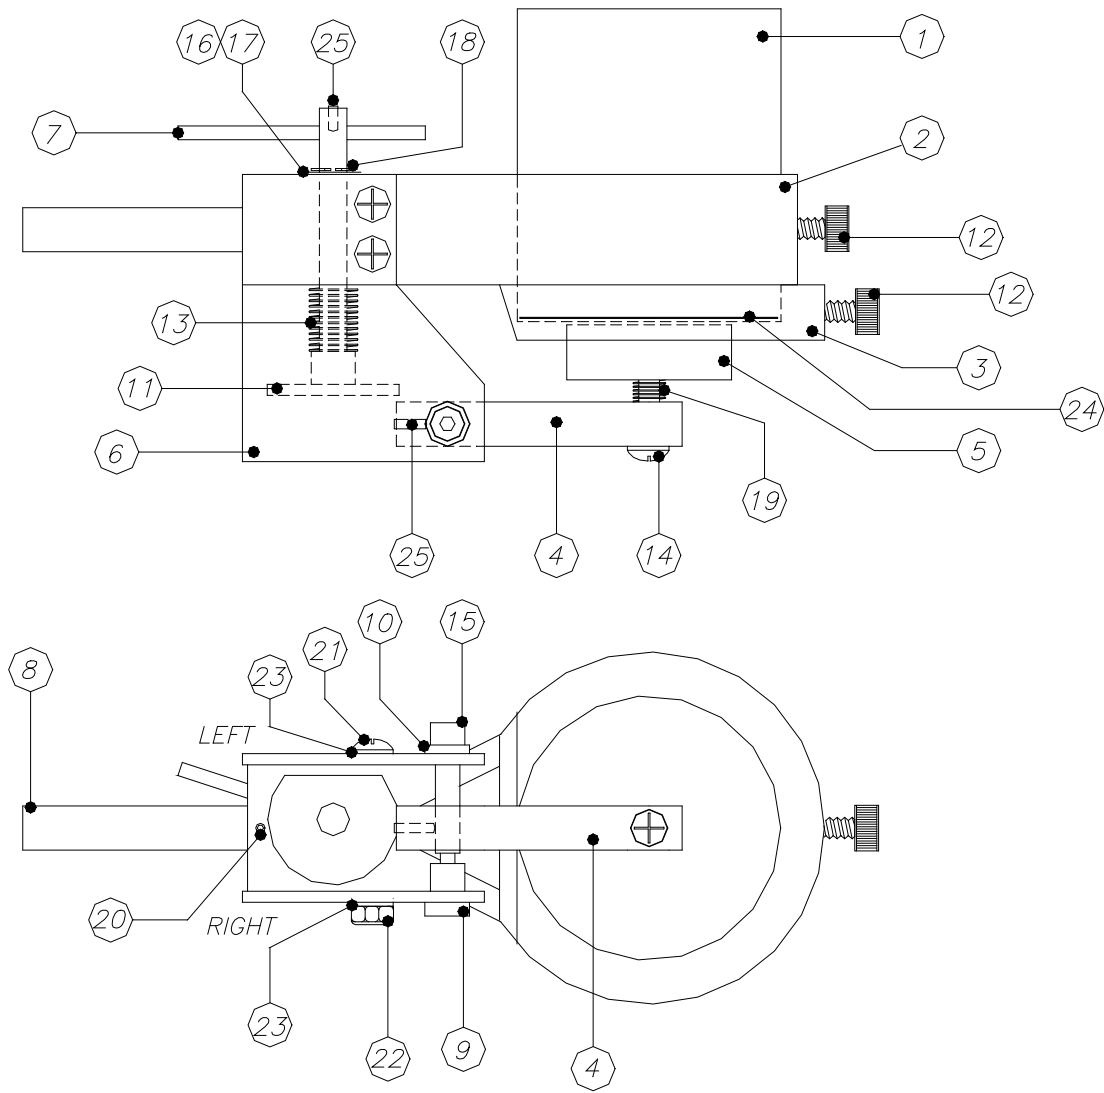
Stainless cylinder assembly (p/n 21-101-051)
